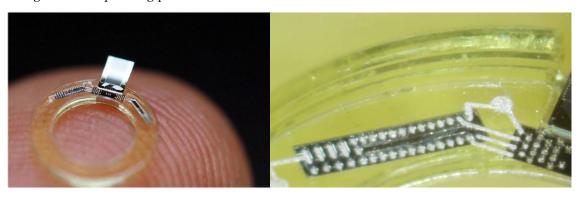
3D printed microelectronic demonstrator to facilitate endoscopic ultrasound on a catheter tip. (Left) Isometric view of manufactured demonstrator on a finger tip. (Right) Isometric view of printed silver-based interconnects (90 µm pitch) on an ASIC chip.
